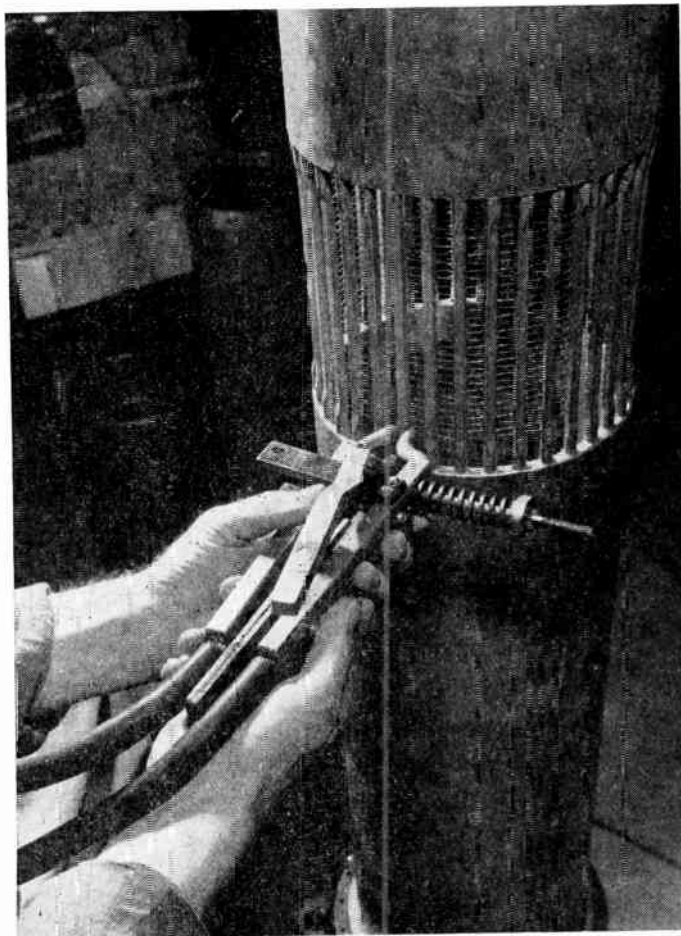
Control grid under construction—tungsten wire spot welded to nickel grid bars.
